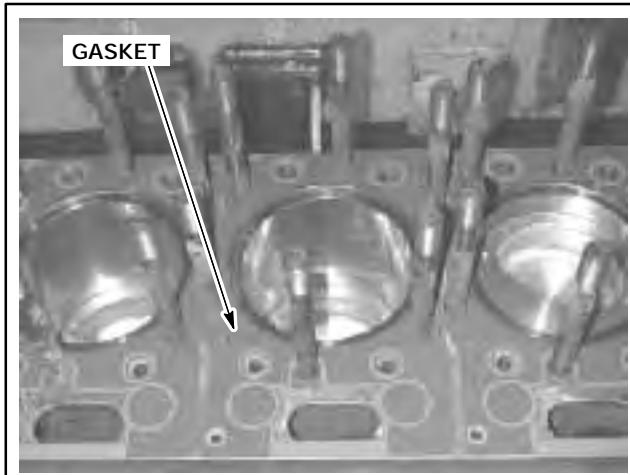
Cylinder Head Gasket - P/N 300000D
